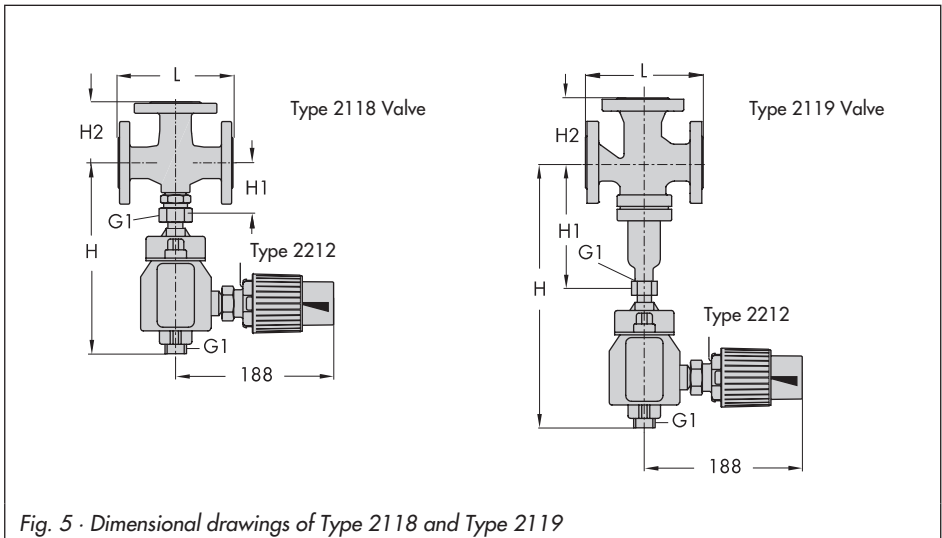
· Dimensional drawings of Type 2118 and Type 2119
